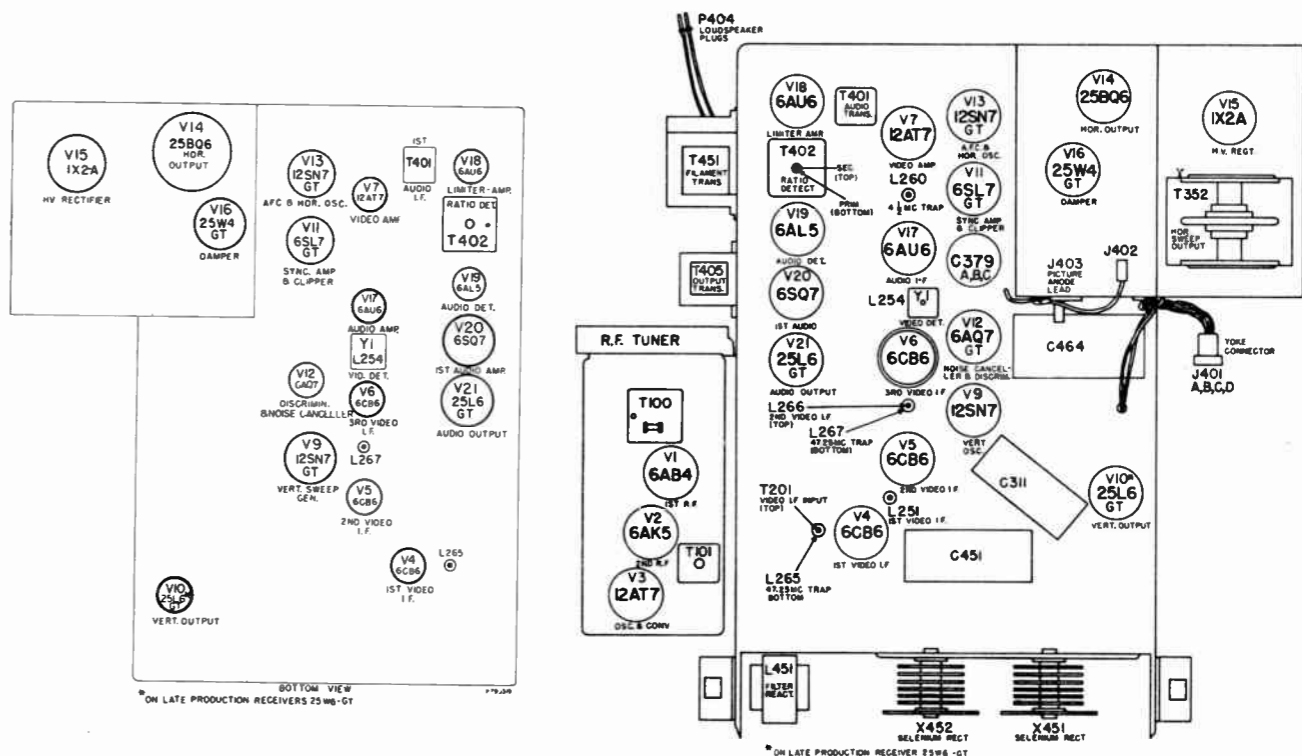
UHF-103 Tube and Component Layout, Bottom View
